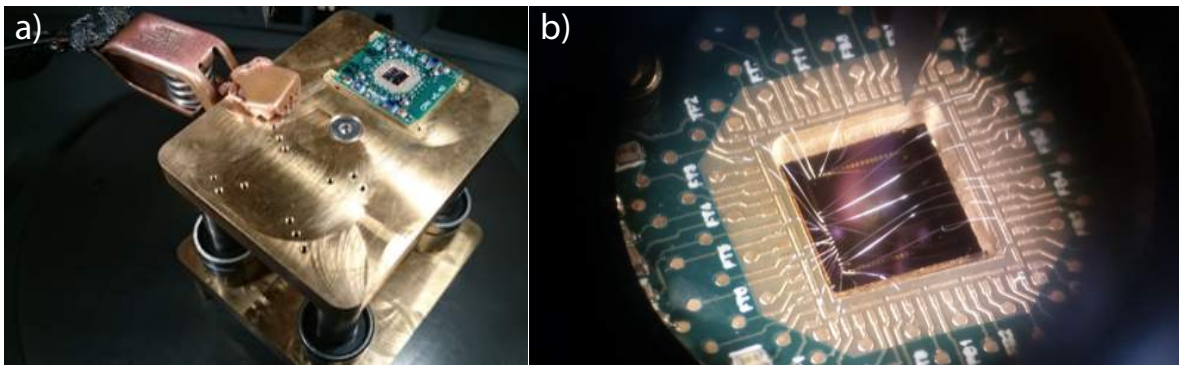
Wire bonding devices to the daughterboard. *a) Bonding stage that the daughterboard is placed via interposer that is in contact with grounded stage. b) Daughterboard with bonded wires to the chip bonding pads.
